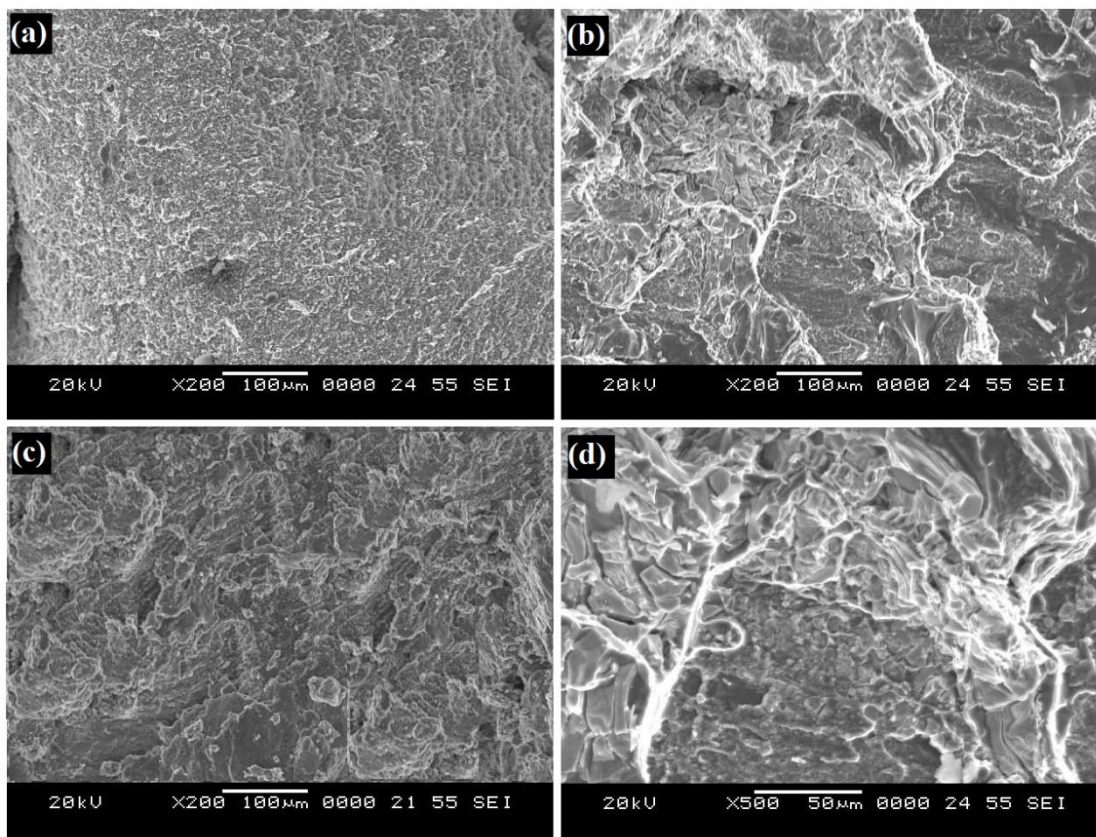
SEM images of tensile fracture surface (tested in the direction of weld) of Al-10Mg-8Ce-3.5Si aluminium alloy joints friction stir welded using SPP tool, at (a) Speed of tool rotation of 1000 RPM and welding speed of 10 mm/min, (b) Speed of tool rotation of 1000 RPM and welding speed of 15 mm/min, (c) Speed of tool rotation of 1000 pm and welding speed of 20 mm/min, (d) Higher magnification image showing the dimples, pullout, decohesion and cracked AlSiMg particles.
